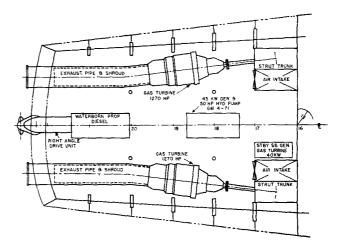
Hydro Foil Patrol Craft PC-H Machinery Arrangement.
